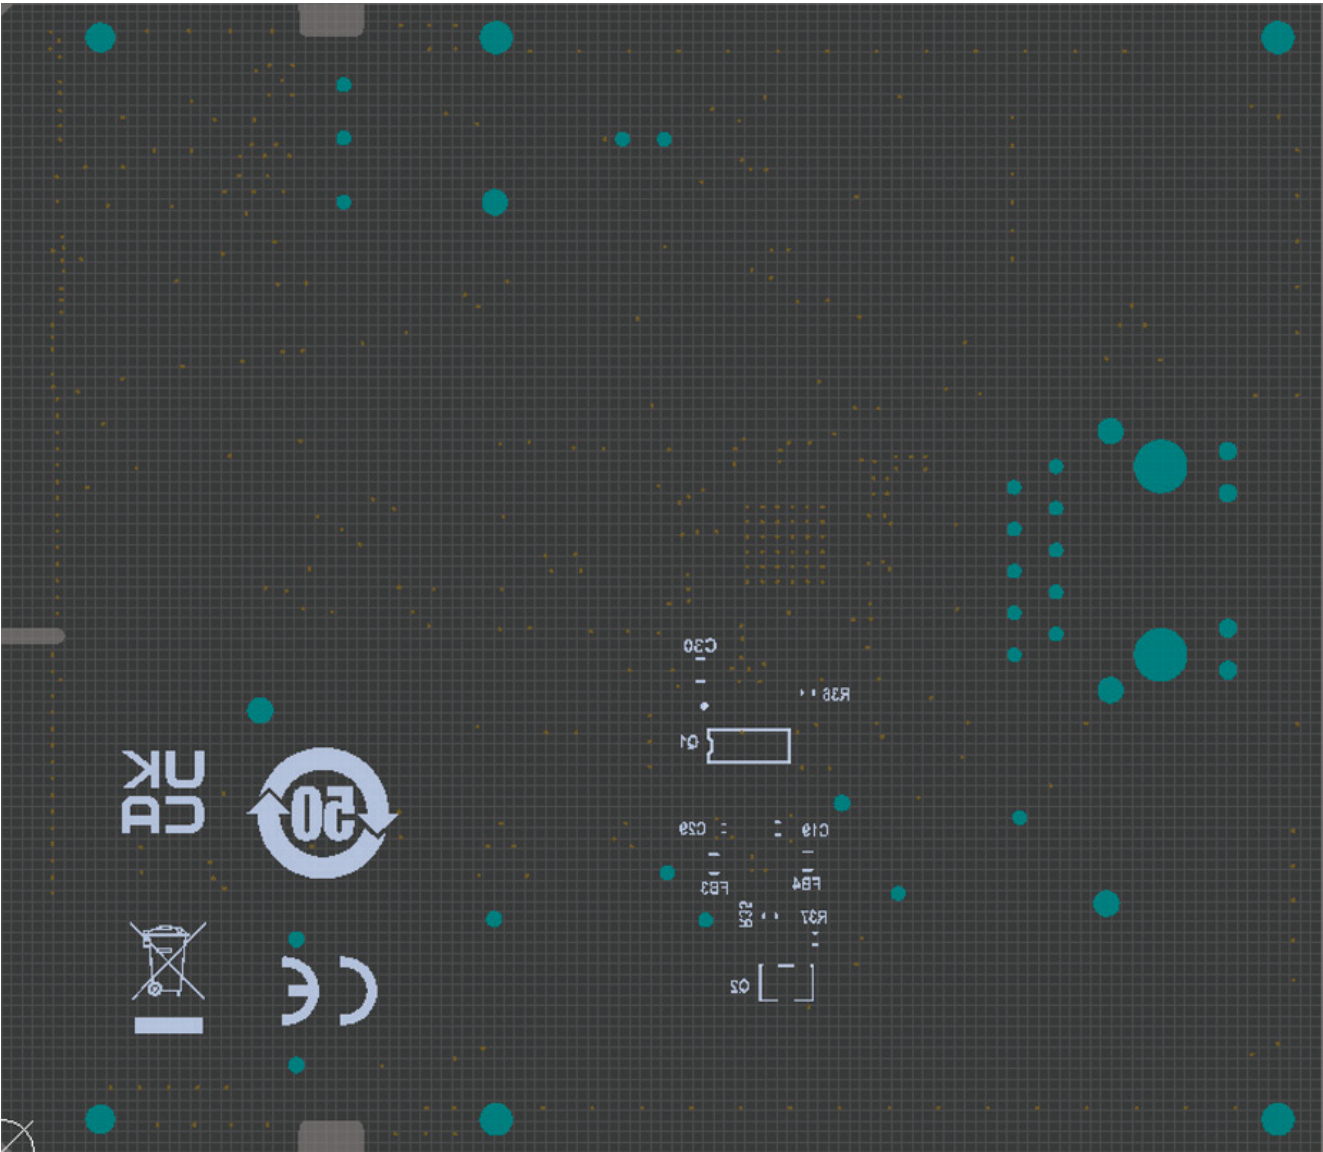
KSZ9131 EDS2 DAUGHTER CARD BOTTOM SILK MIRRORED
